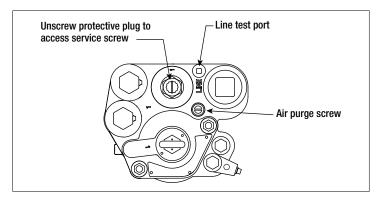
Service Screw, Line Test Port, and Air Purge Screw Locations
